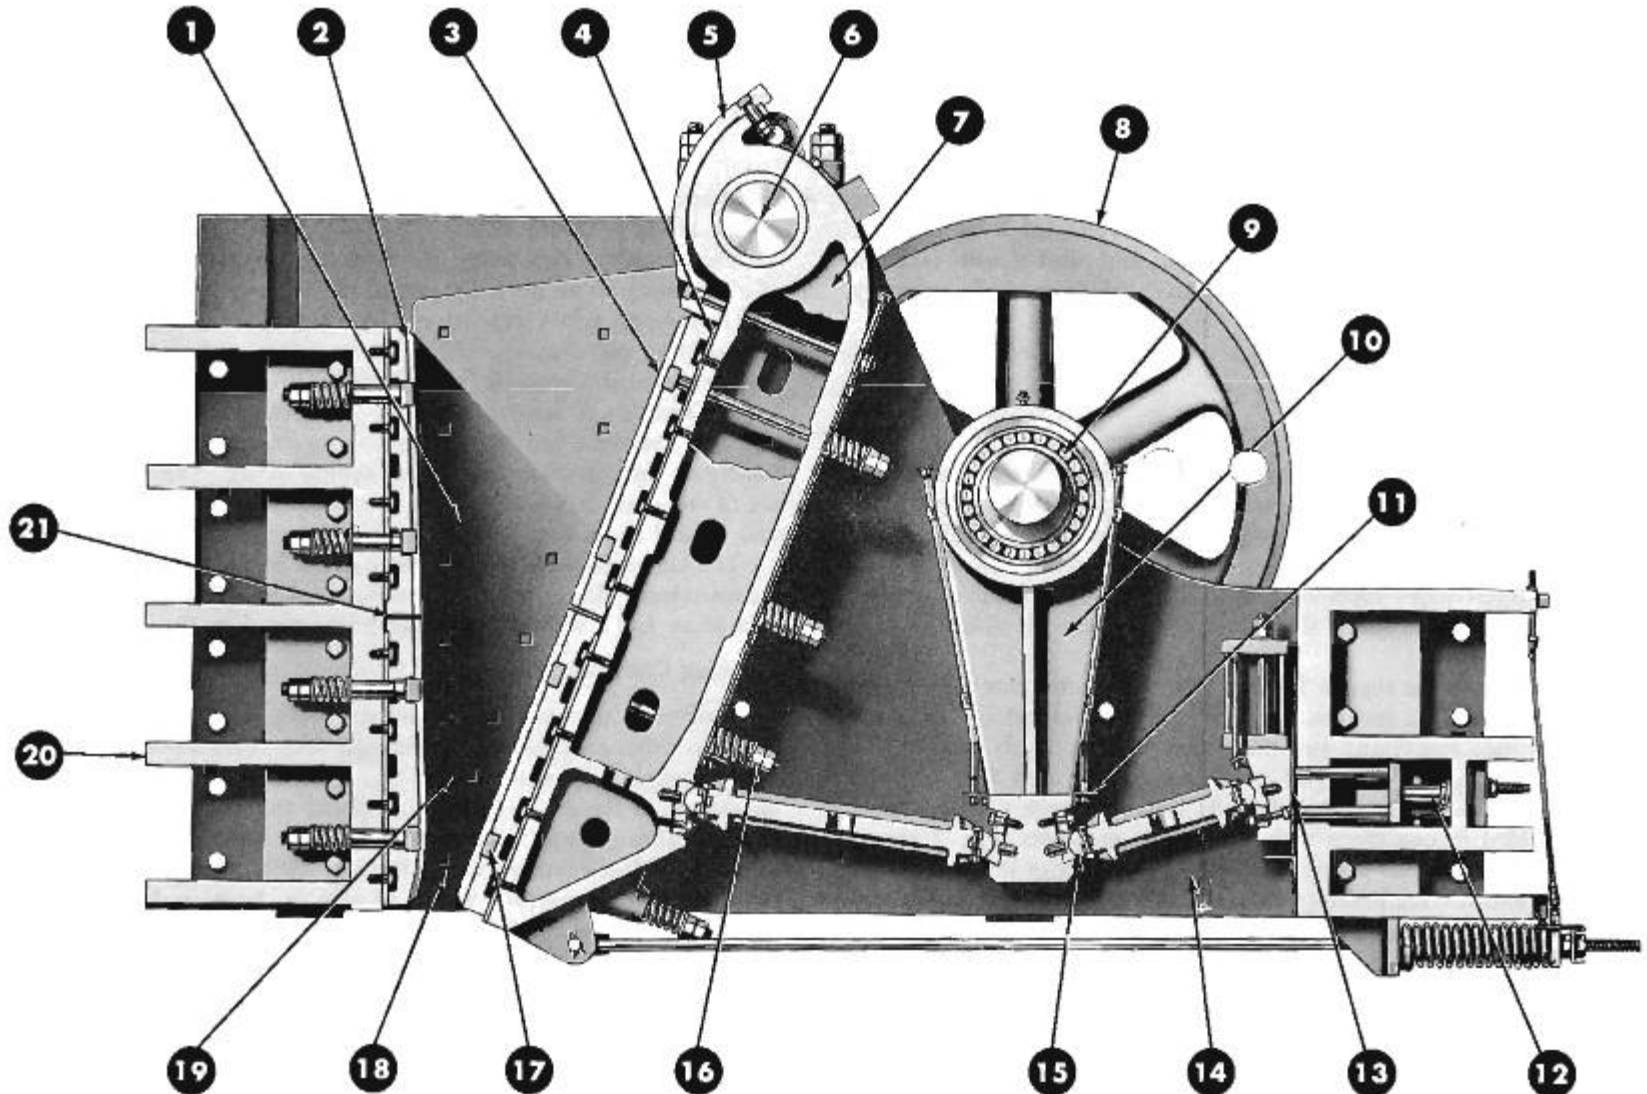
Allis-Chalmers A-1 crusher (courtesy of Allis-Chalmers<sup>1</sup>). Legend: (1) crushing chamber, (2) fixed jaw plate, (3) interchangeable swing jaw plates, (4) protective wear plates, (5) swing jaw deflection plate, (6) swing jaw shaft, (7) swing jaw, (8) balanced flywheels (one driven), (9) anti-friction bearings, (10) steel cast and welded pitman, (11) shields over pitman toggle seats, (12) hydraulic setting control, (13) setting shims, (14) frame side plate, (15) toggle ends and seats, (16) bolt tension springs, (17) cap nuts, (18) crusher discharge, (19) manganese check plates, (20) ribbed front and back, (21) expansion joint.
